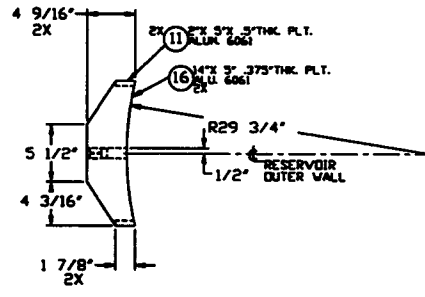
STAMP P/N HEAT/LOT NO. ON ONE SIDE
